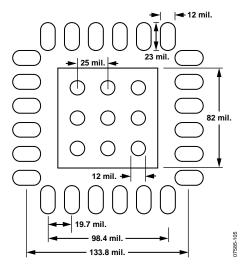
Dimensions for Evaluation Board Layout for the ADL5380 Package
